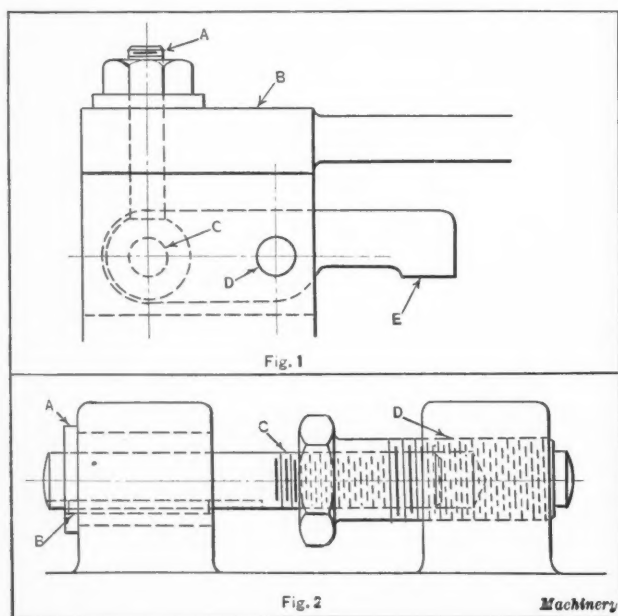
Clamp for Box Jig Fig. 2. Centralizing Clamping Screw
